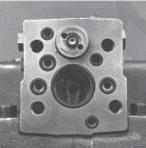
End Cap O-Rings Installed for HC Control
